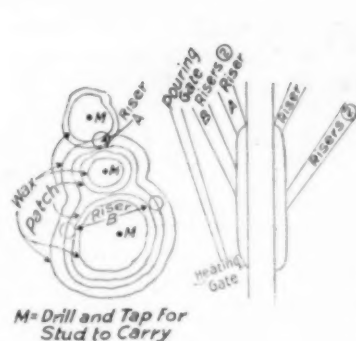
METHOD OF WELDING KETTLE BOTTOM
